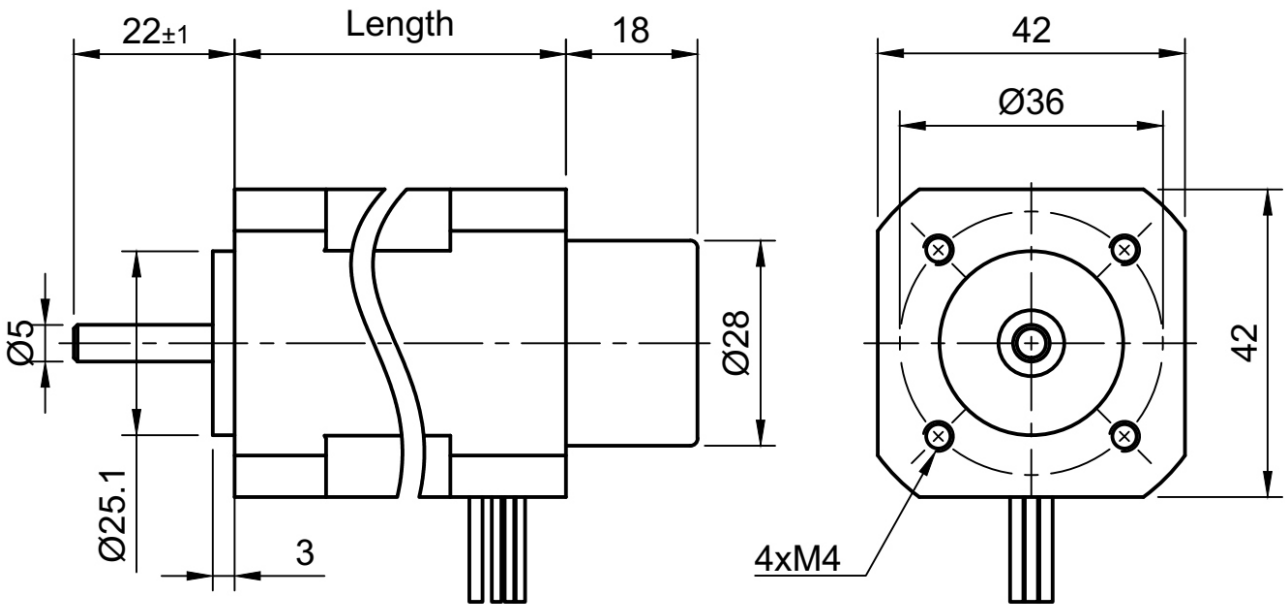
Dimensions of motor & encoder kit (all units = mm)
